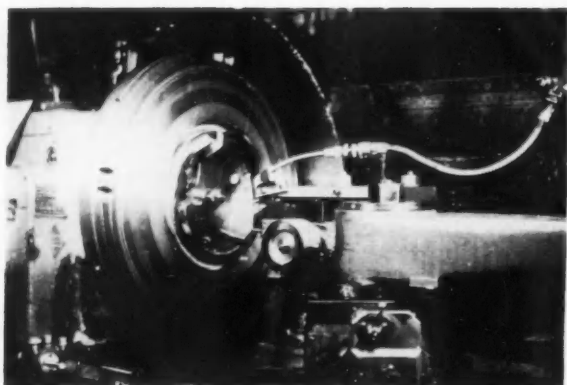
Face-plate fixture on Monarch air tracer lathe for semifinish contouring outer face of compressor disc.
